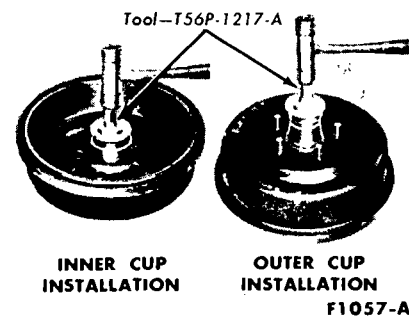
Installing Front Wheel Bearing Cup—All Fairlane, Comet, and Mustang and 8-Cylinder Falcon
